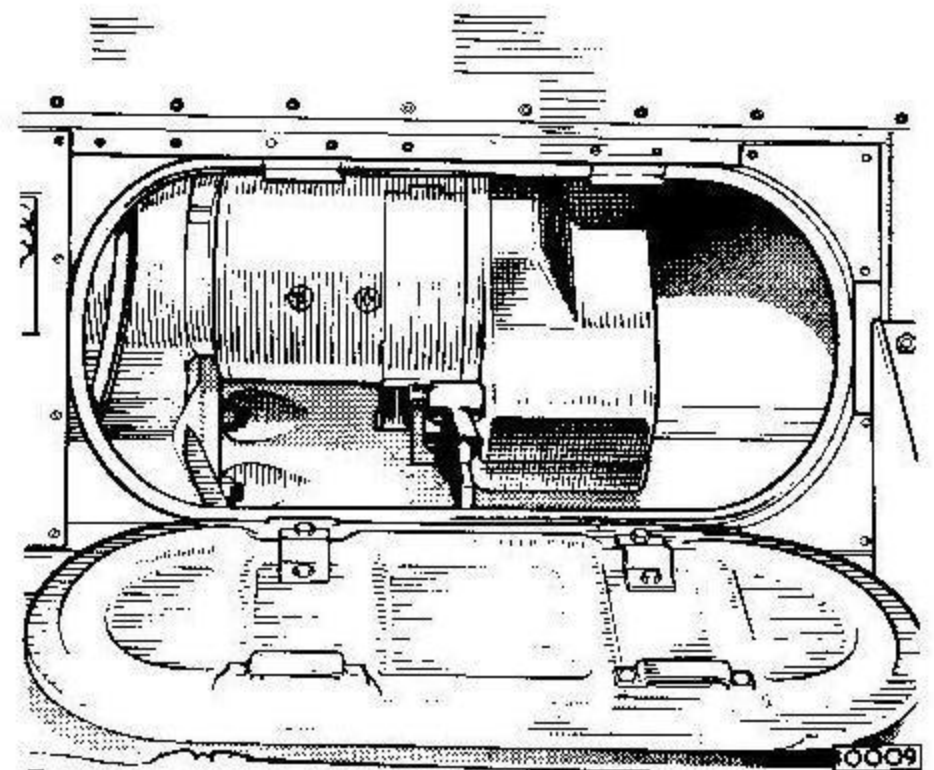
Bulkhead panel lowered to gain access to starter motor
